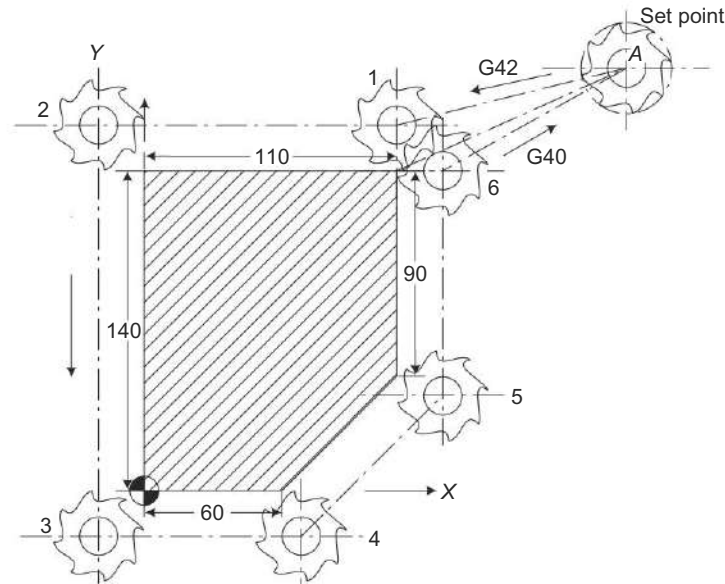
Example showing the cutter-radius compensation using the G codes G42
